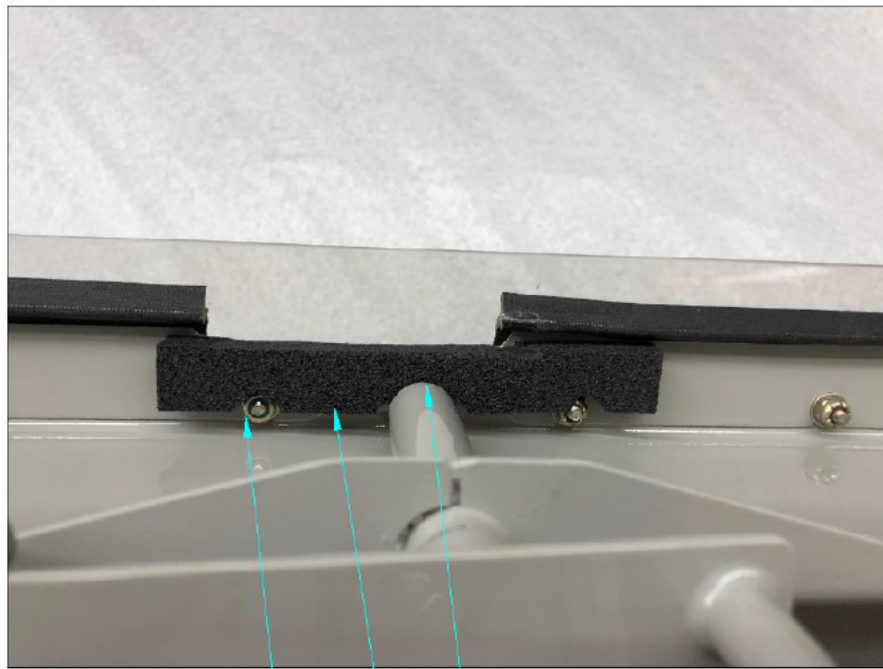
CANOPY LATCH SWITCH INSTALLATION
